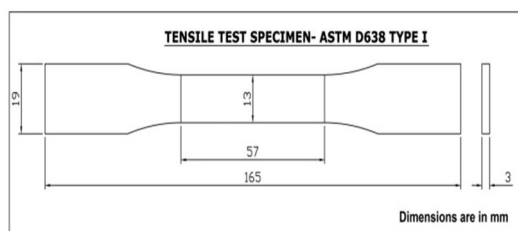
Tensile test specimen dimensions as per ASTM D638 Type-I
